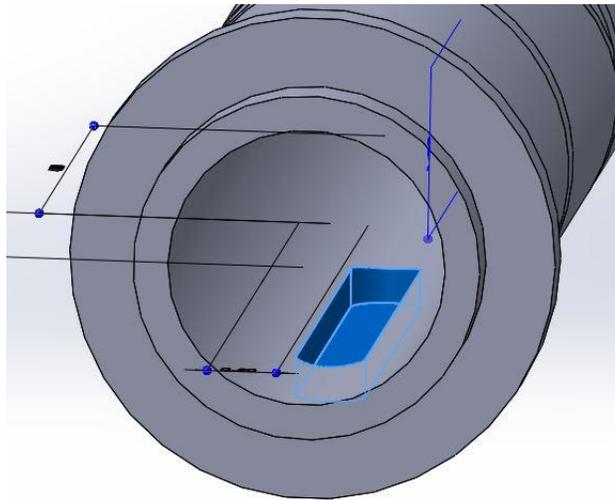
Drive End Iteration #1, Shaft Sleeve Internal Key Slot
